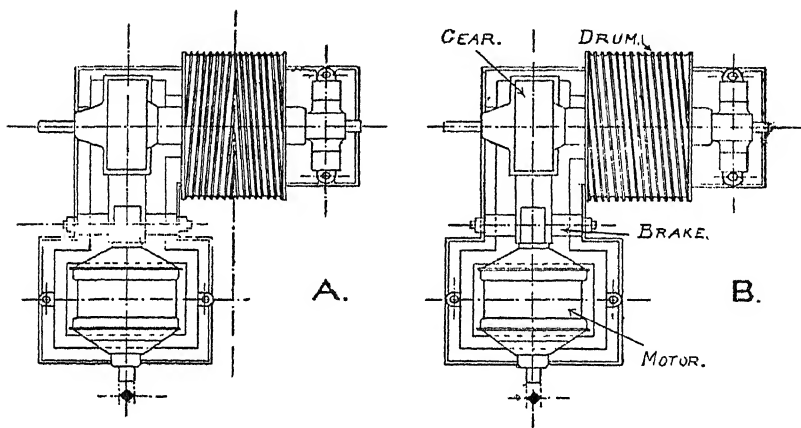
Types of winding drums : A, Grooved from flange to centre (engine overhead). B, Grooved from flange to centre (engine below).
